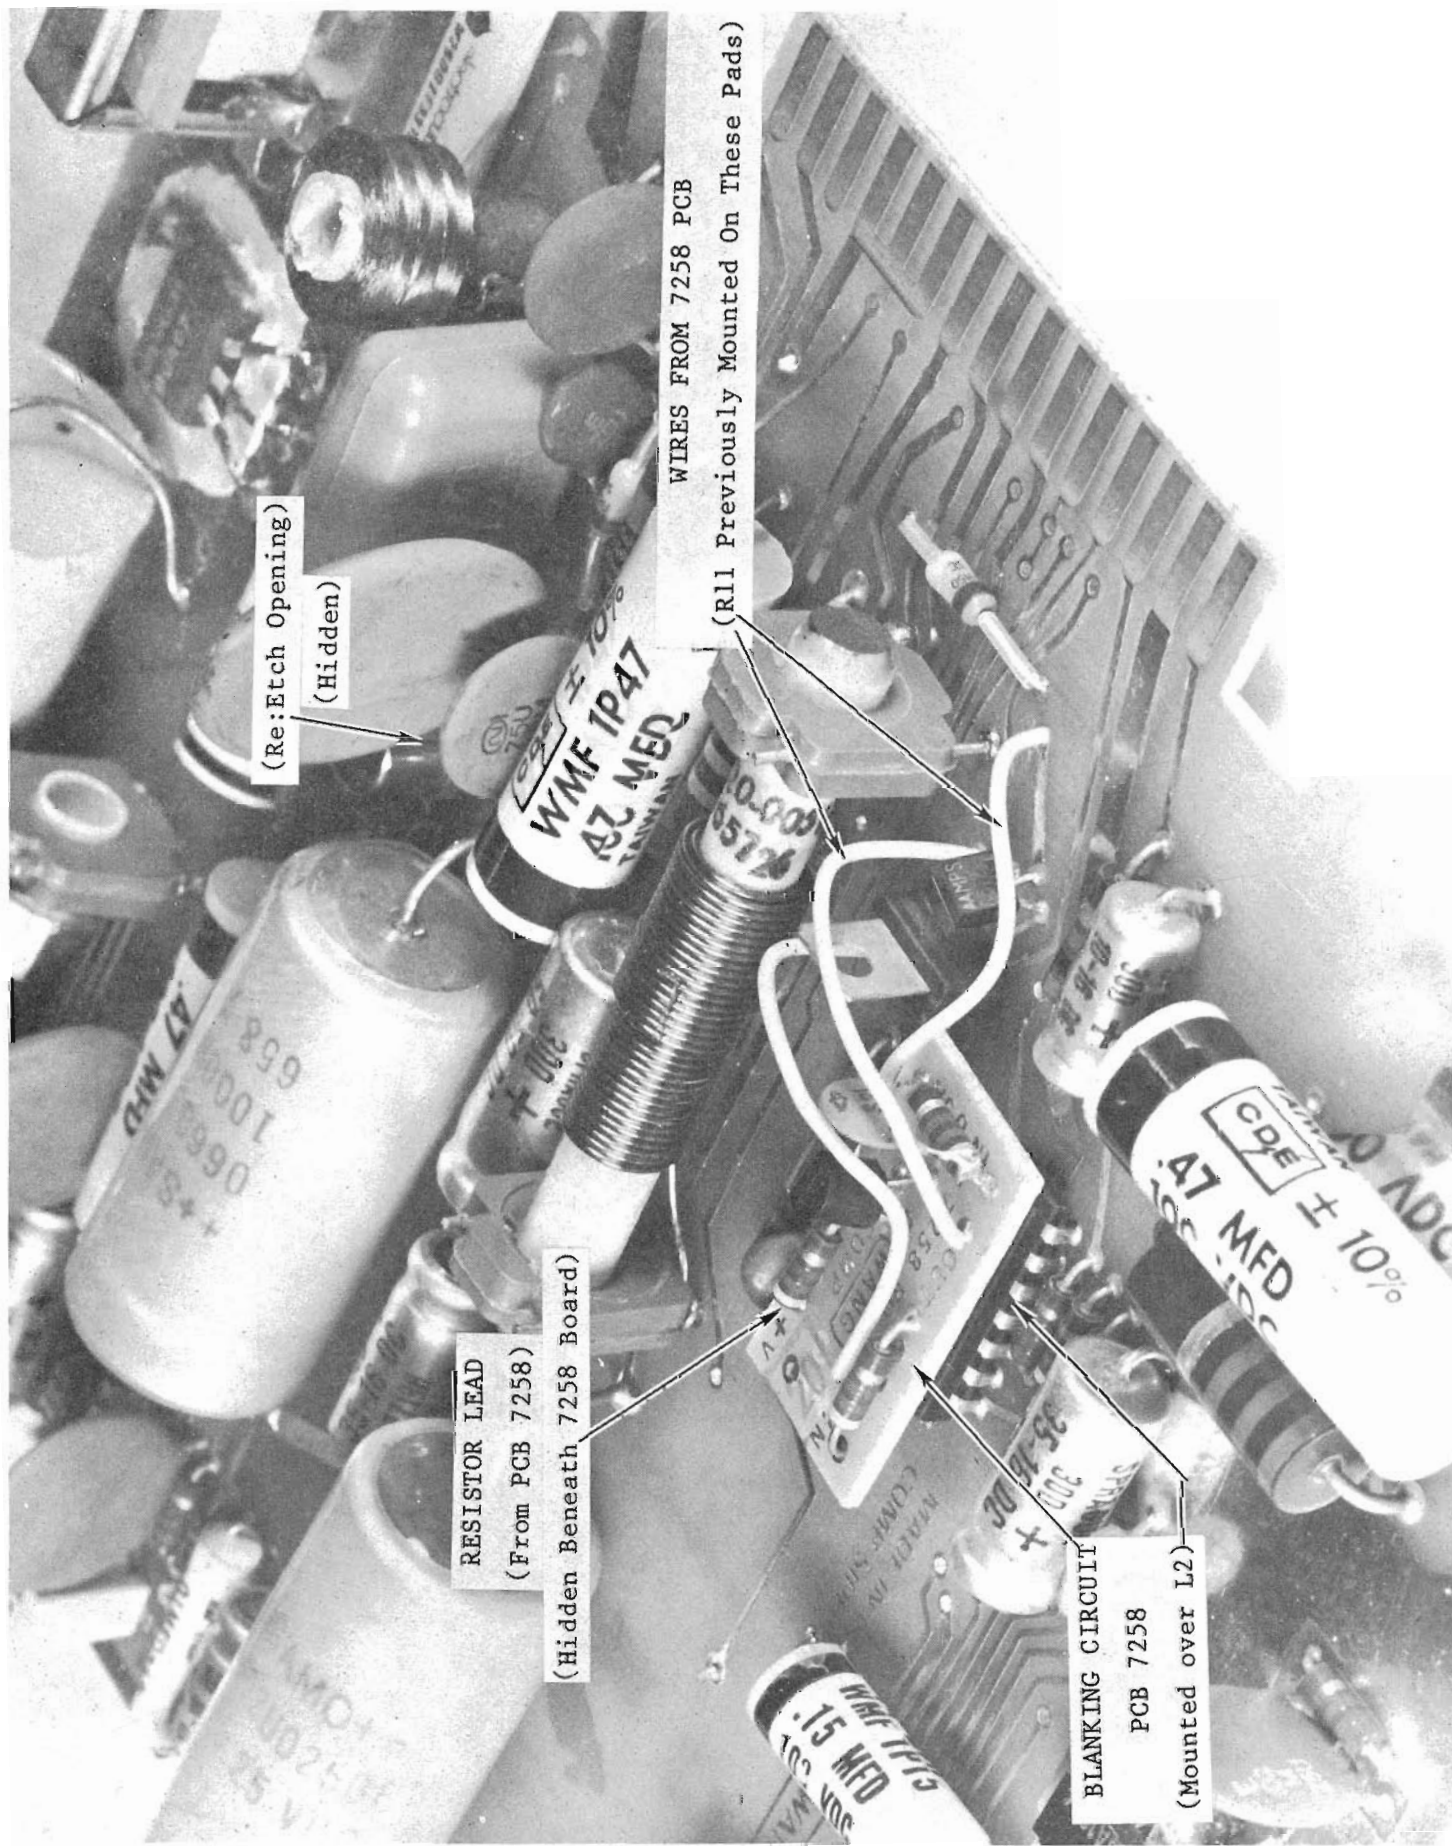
FIELD MODIFICATION FOR ALJING BLANKING CIRCUIT (PCB 7258)
